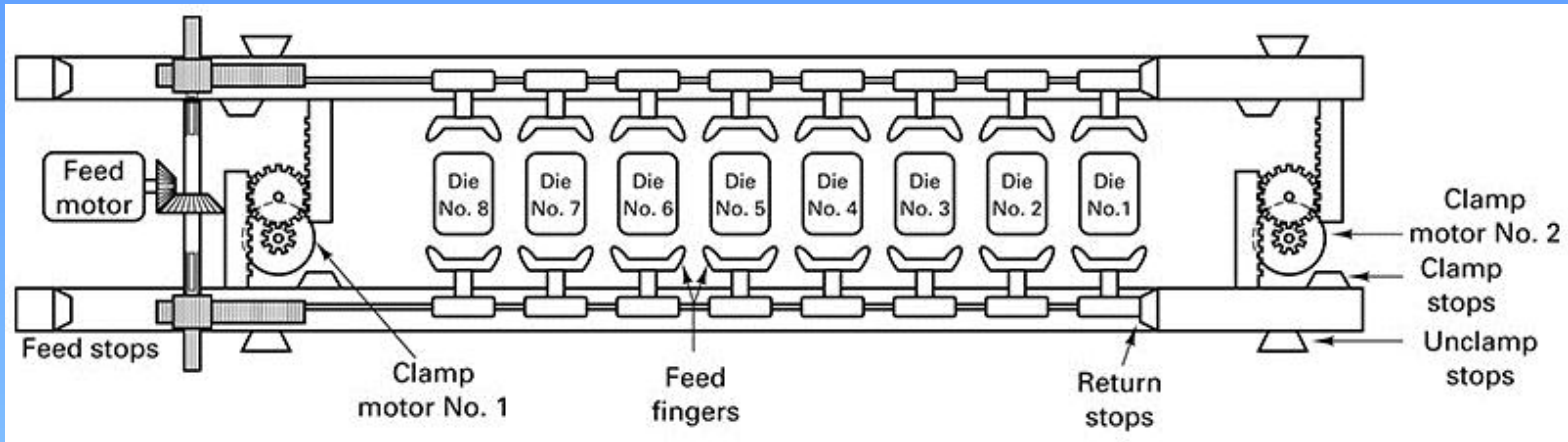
Schematic showing the arrangement of dies and the transfer mechanism used in transfer presses. (Courtesy of Verson Allsteel Press Company, Chicago, IL.)
